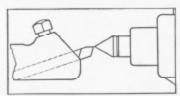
Set Cutting Edge of Lathe Tool Exactly on Center
